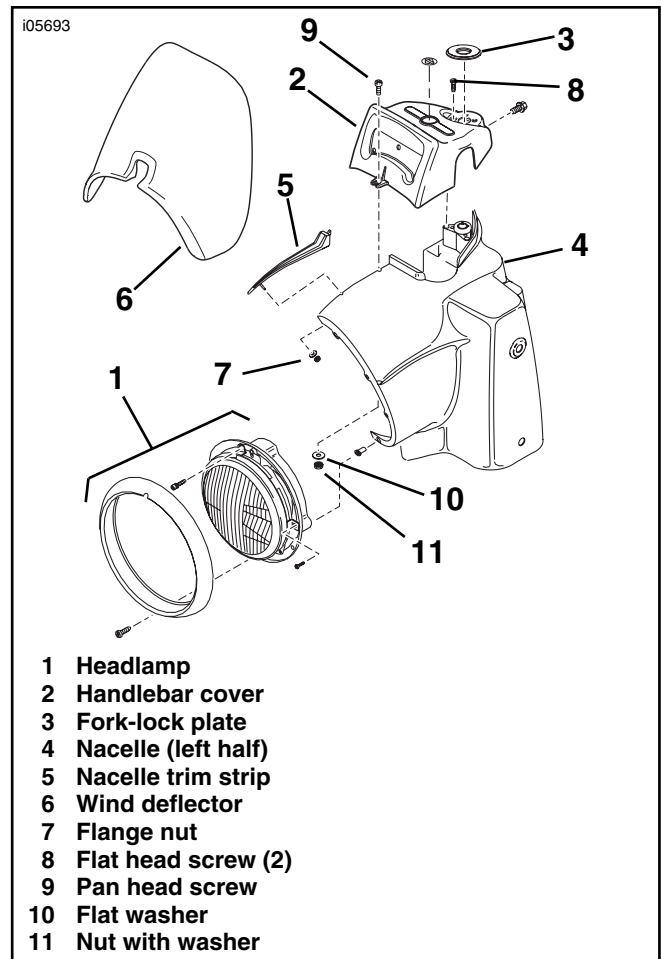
Nacelle, Headlamp, and Handlebar Cover (FLHRS Model)
